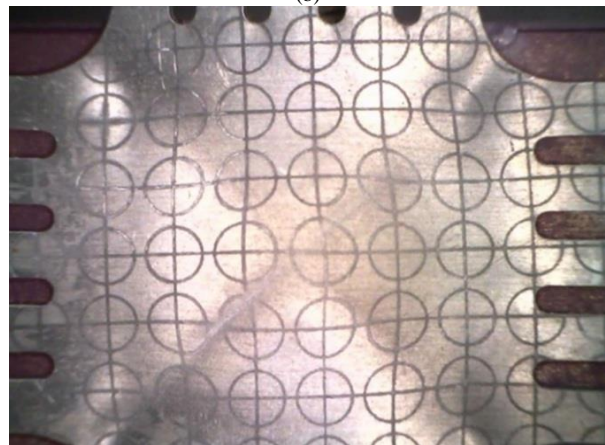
The cruciform specimen fracture from Al. alloy 5083
